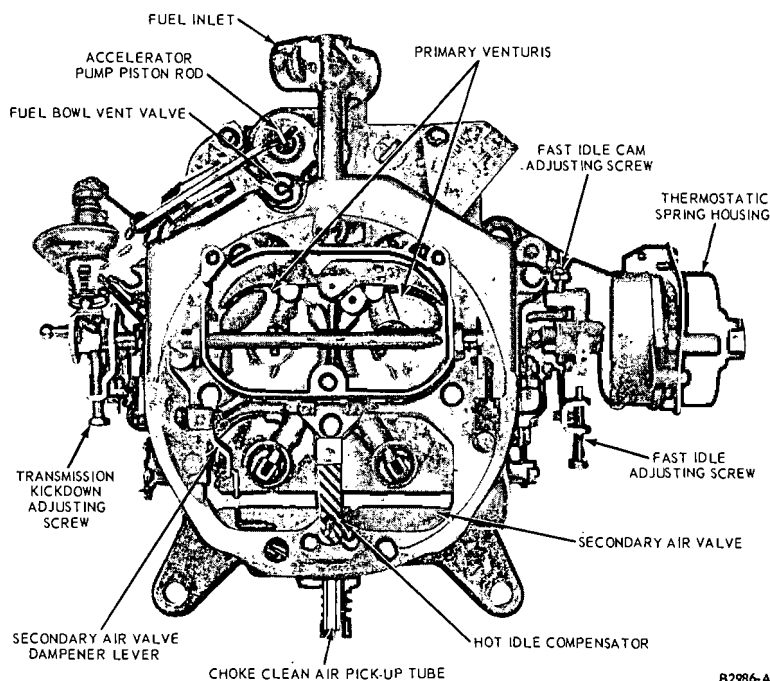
Autolite Model 4300 4-V Carburetor—Top View
